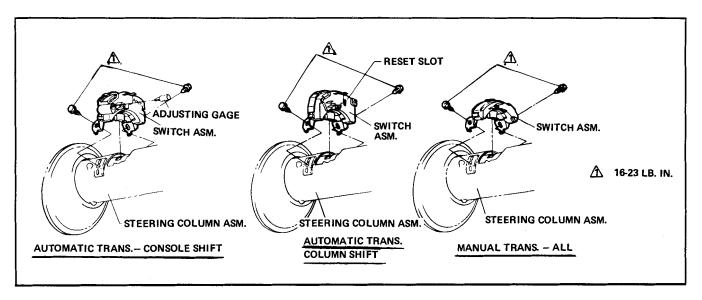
Adjusting Back-up and Neutralizer Switch
